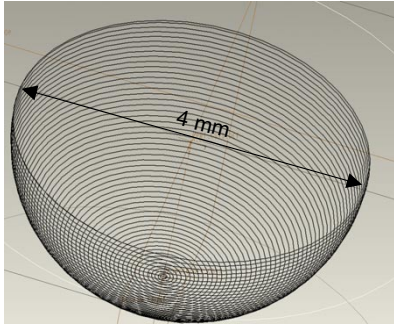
Spiral path generated by using the main-processor of the CAM, which is used for the desired trajectory of the wood stick tool.
